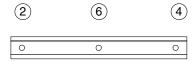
Tightening Pattern for the PCI I/O Module
